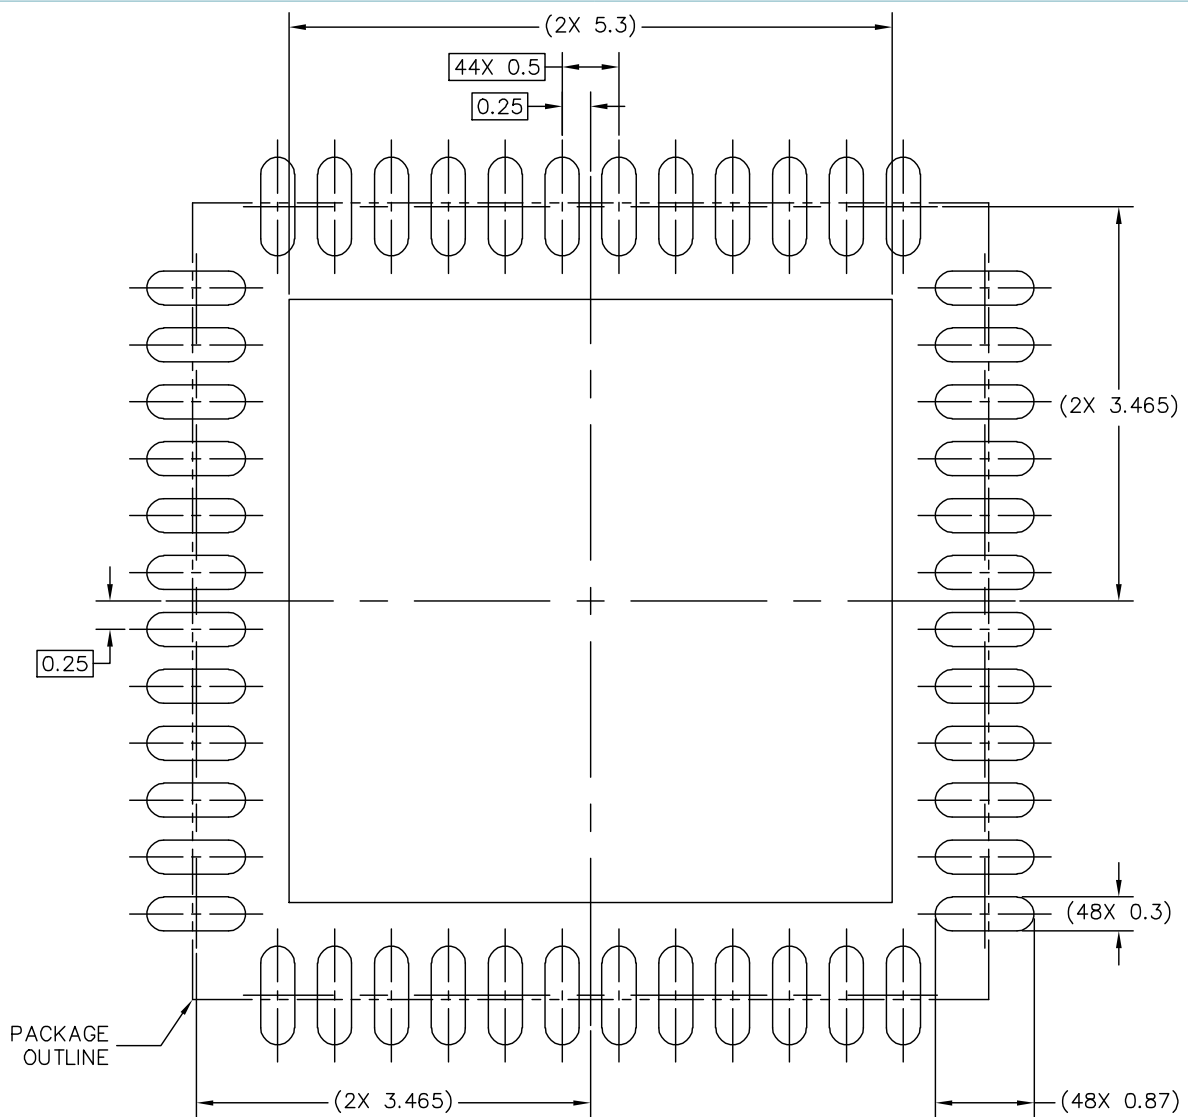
Reflow soldering footprint for SOT619-25(D)
